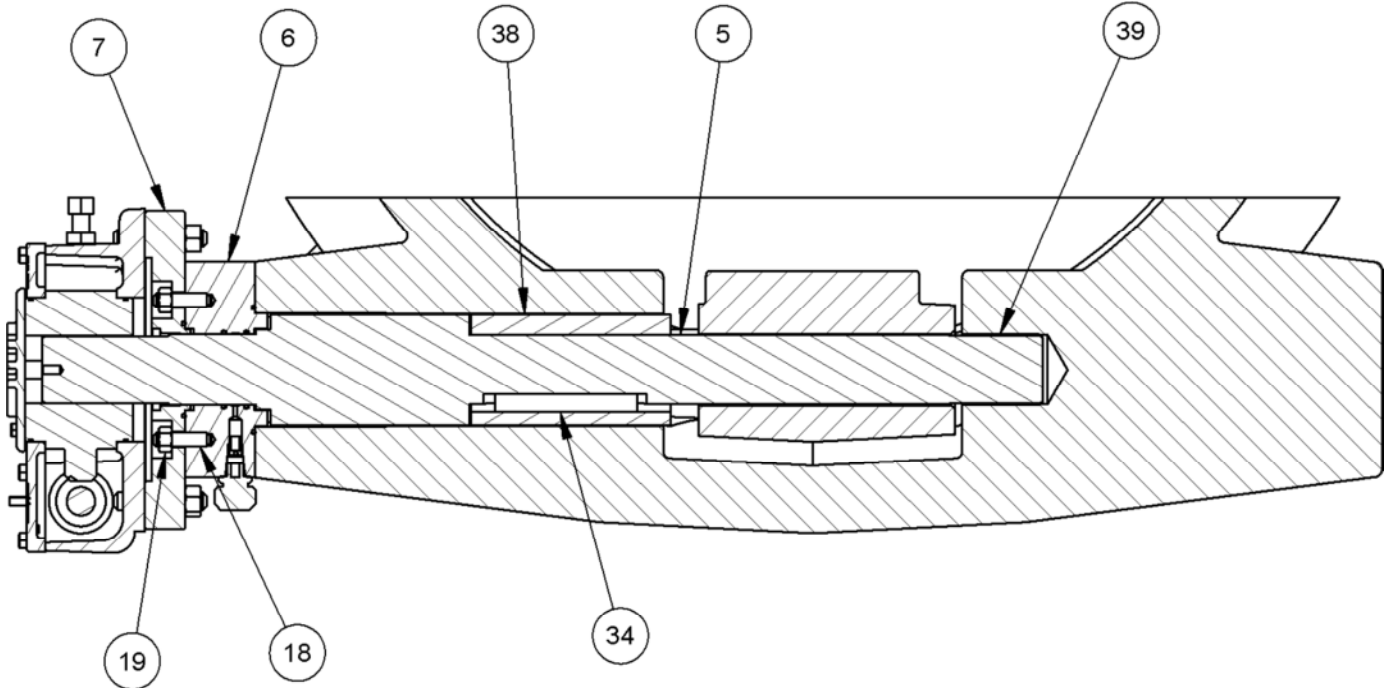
Cross sectional view of gland assembly (at 180°) shown
